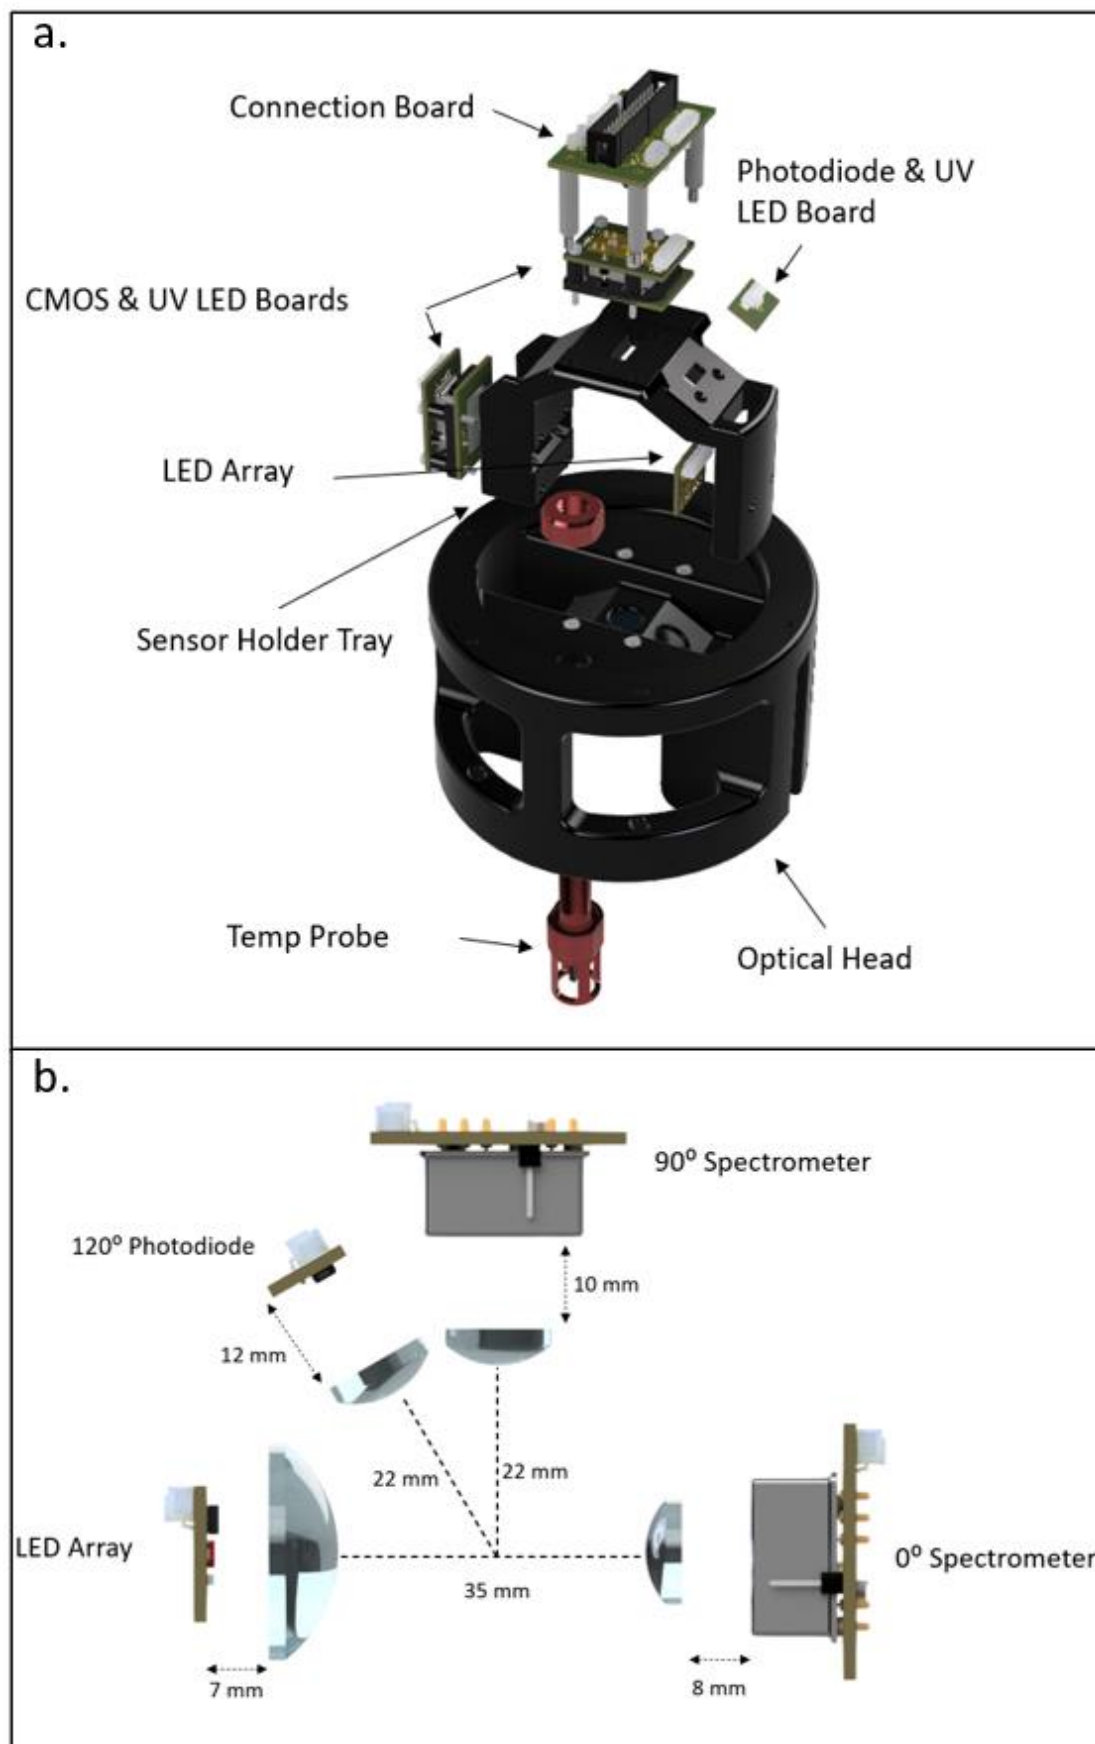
(a) Exploded diagram of optical head assembly with labelled components and (b) a labelled and dimensioned render of the optical component positions.
